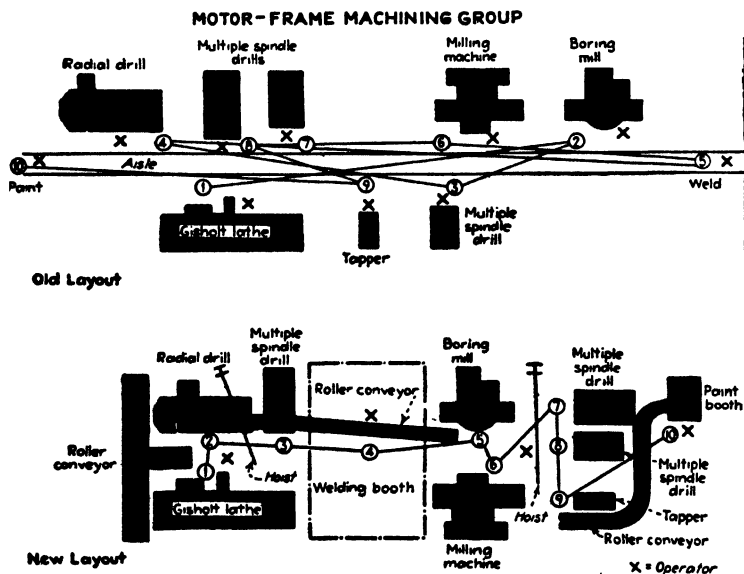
Old and New Layouts of Motor-Frame Machining Group
